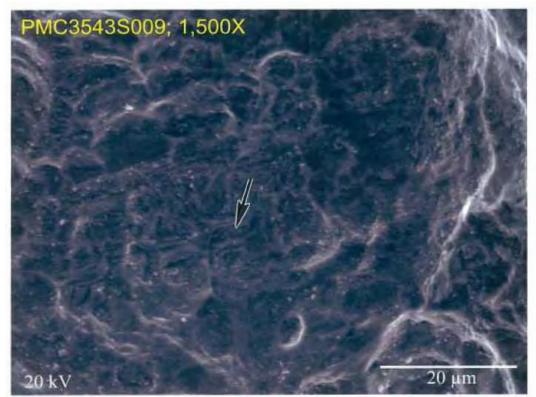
S.E.M photo of eye bar fracture surface at fracture origin, location 9 in fig. 45. 1,500X.
